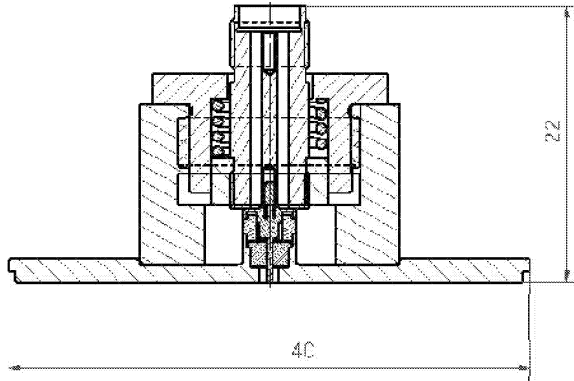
Technical drawing of the coaxial RF pick-up (the dimensions are in mm).
